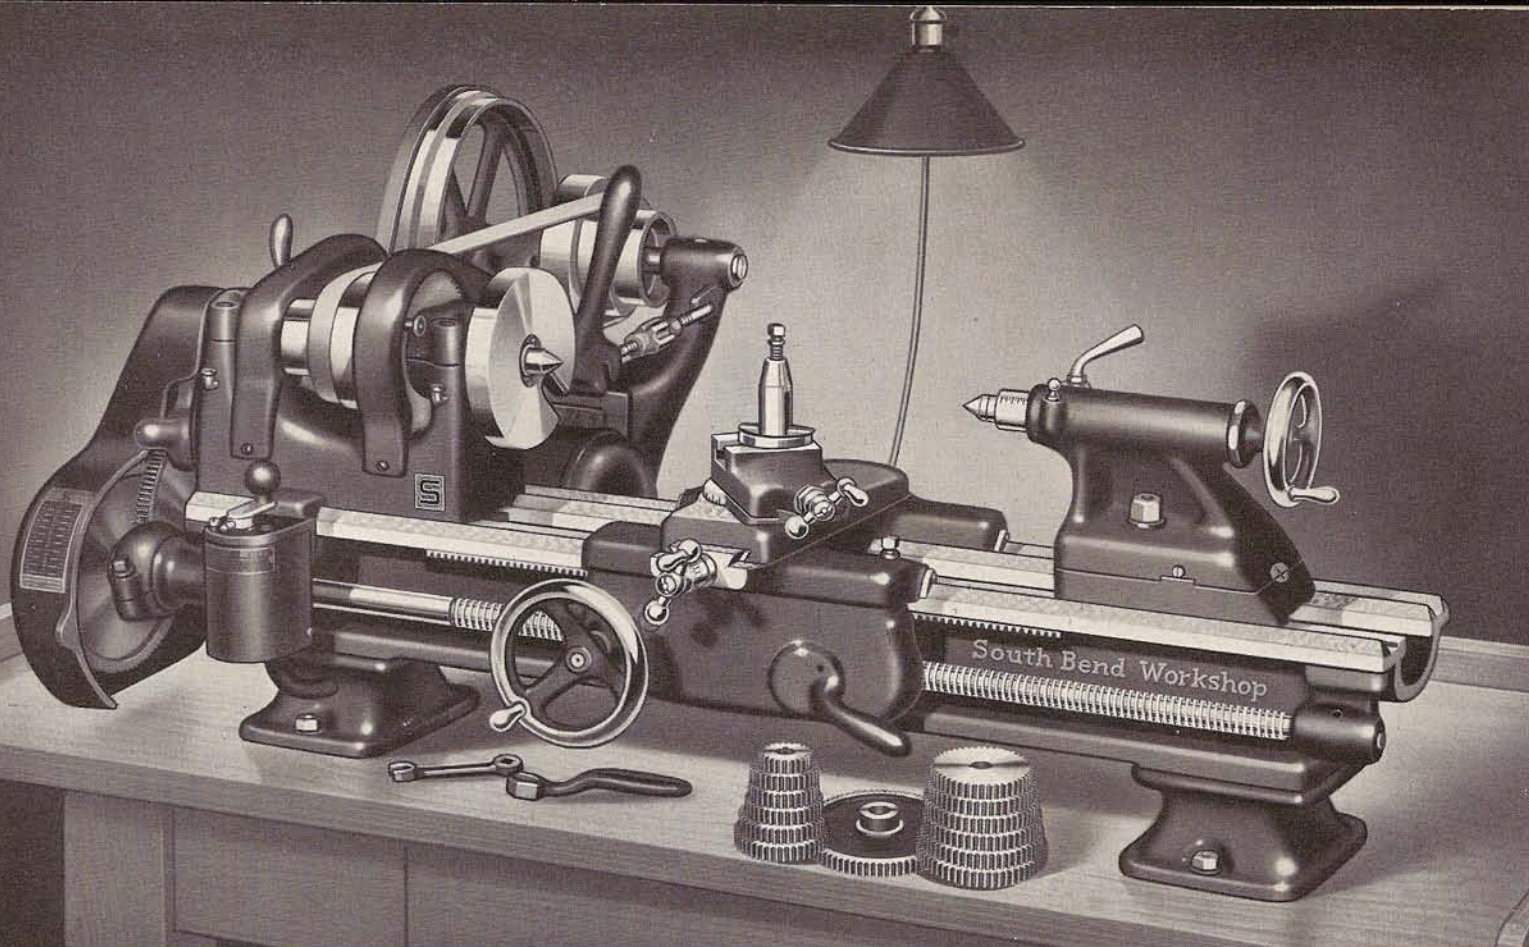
Cat. No. 615-Y, 9"x3' "Workshop" Twelve-Speed Motor Driven Bench Lathe, complete as shown, but less bench. (Ship. wt. crated 335 lbs.). \$140.00
